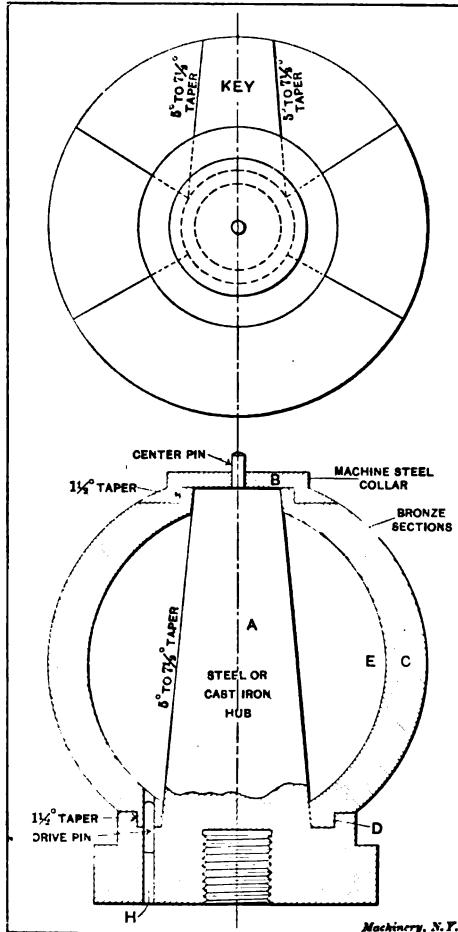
Elevation and Plan showing Construction of Sectional Chuck
